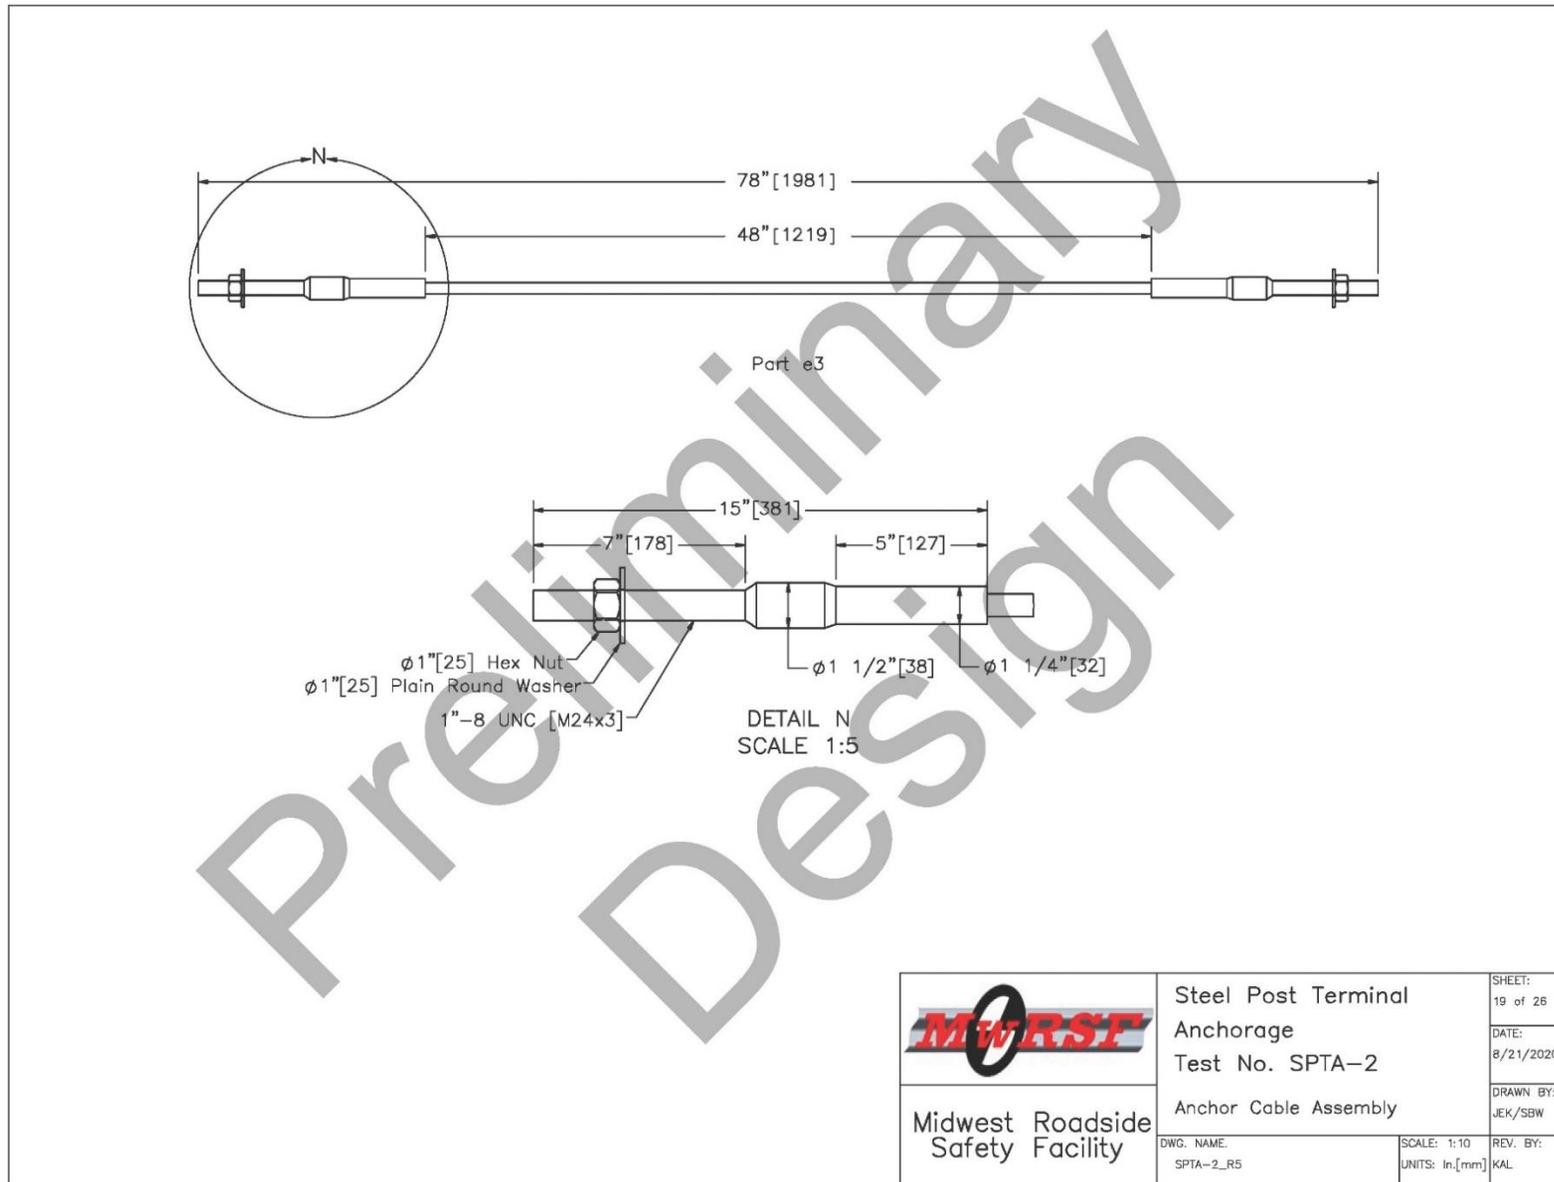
Anchor Cable Assembly, Test No. SPTA-2
